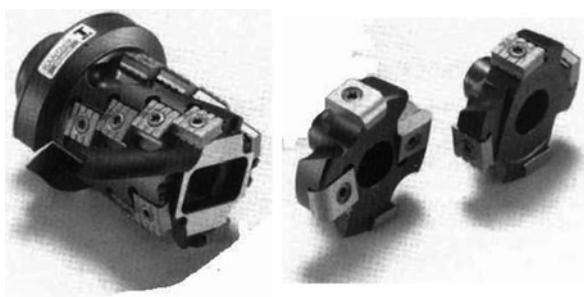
Modular shell end mill (Source: Sandvik Coromant)
